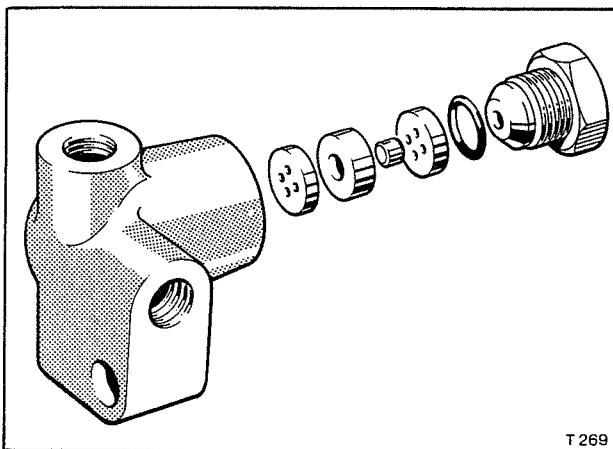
Solenoid restrictor valve (high and low pressure pipe lines)
